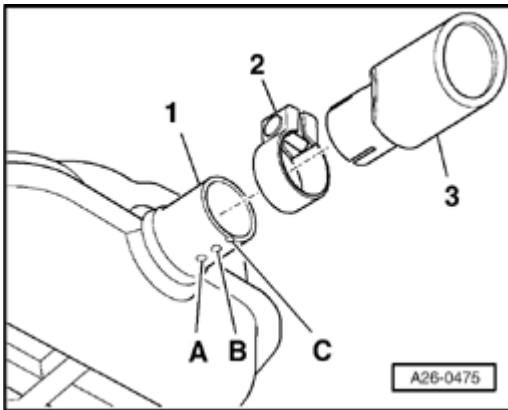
Identifying End Pipes, Separating Point, Markings & Clamps
